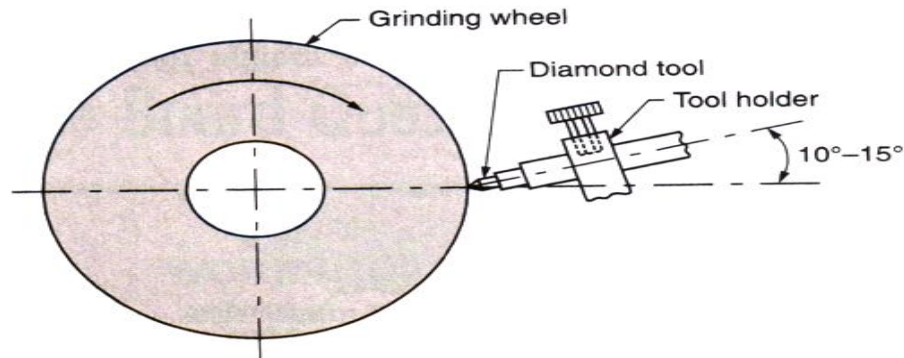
Dressing a grinding wheel with a diamond dresser.
